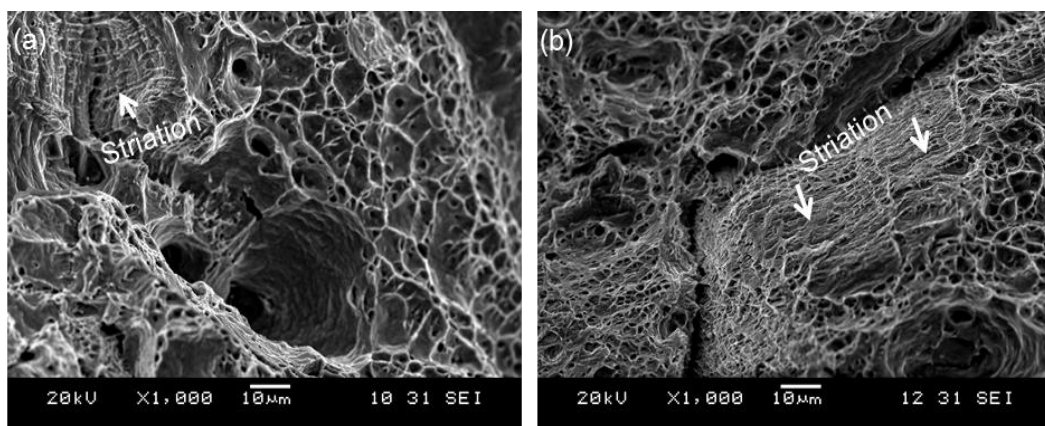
Fatigue fracture surface of IN600 (a) in air, and (b) in 3.5%NaCl solution at pH 6.8
